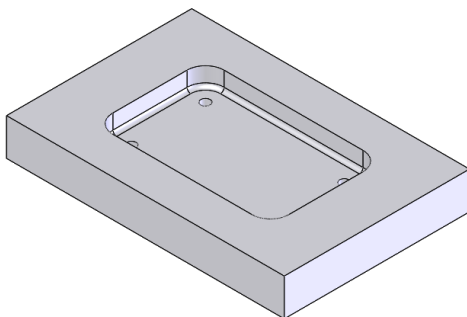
Plate shown in the *Dia 5 Holes* configuration
